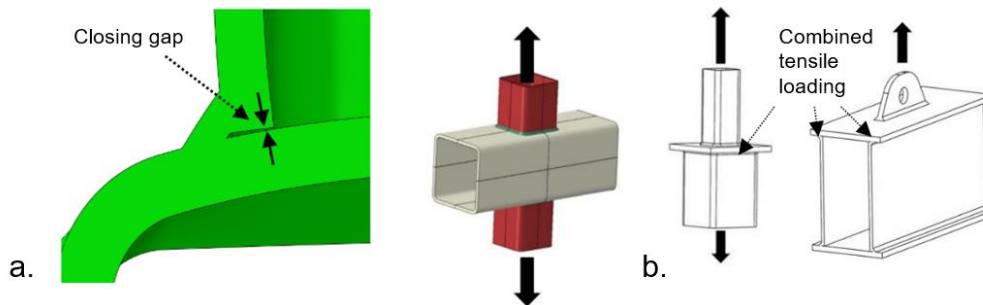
Joints where welds are subjected to secondary bending moments causing a) compressive stresses in the weld root and b) tensile stresses, respectively.
